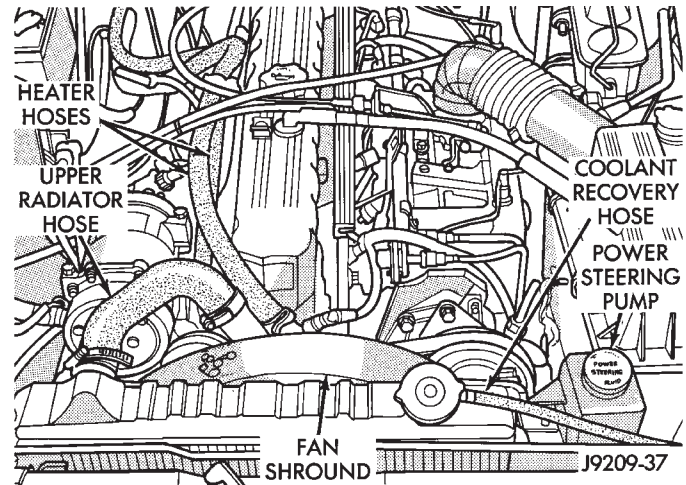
Upper Radiator Hose, Coolant Recovery Hose, Fan Shroud & Power Steering Pump
